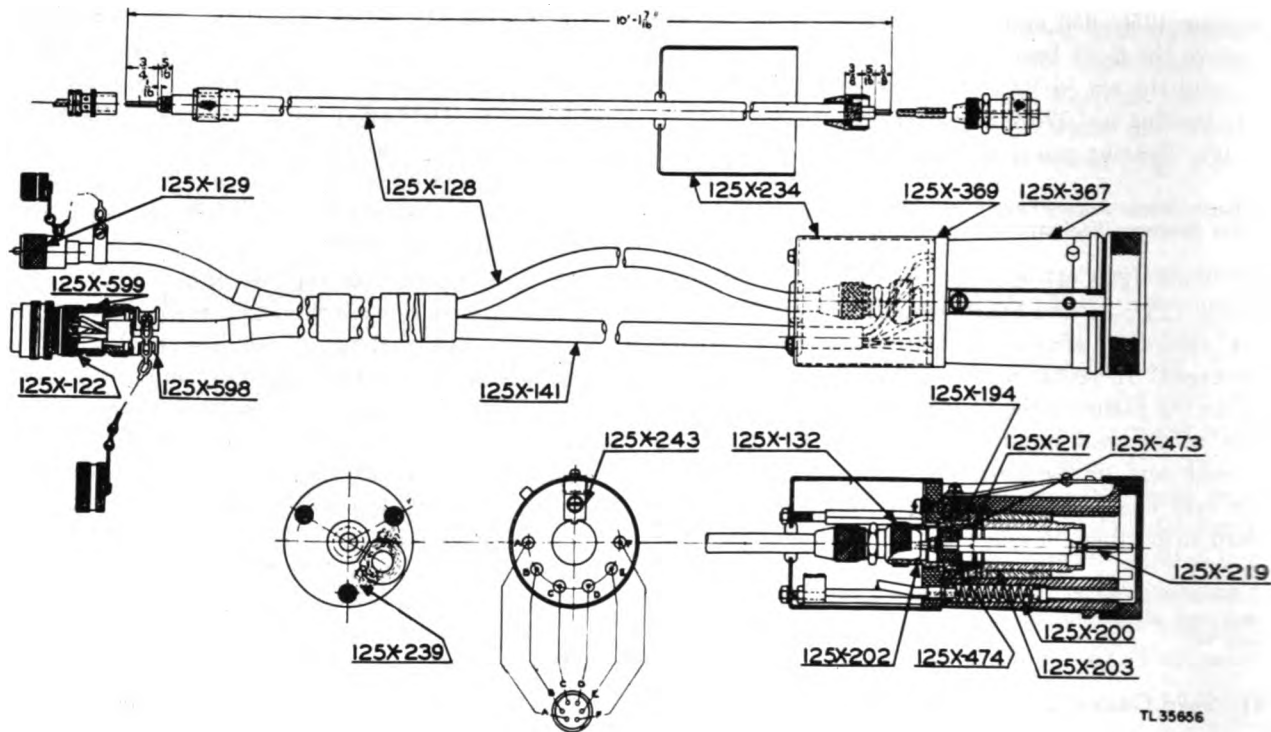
Tower TR-24-A, flexible coaxial line assembly.
